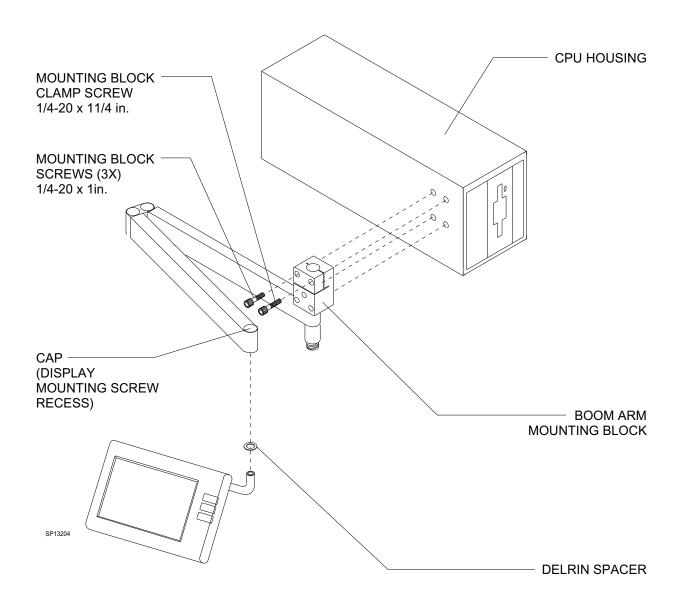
DISPLAY AND EXISTING BOOM ARM REMOVAL
